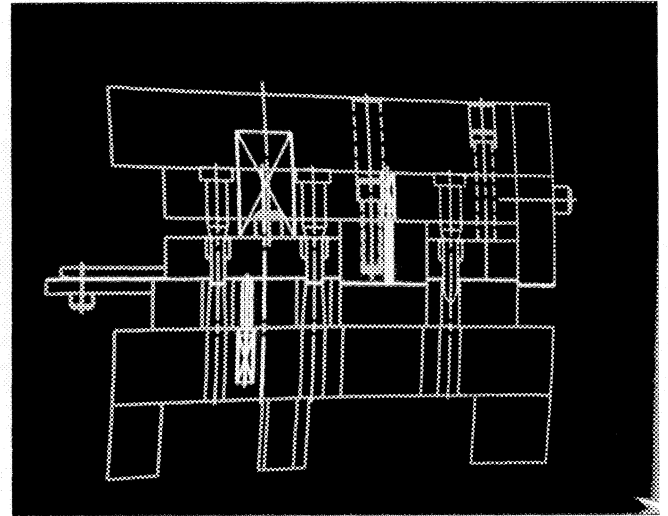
Tooling Fixture Designed on a CAD System
